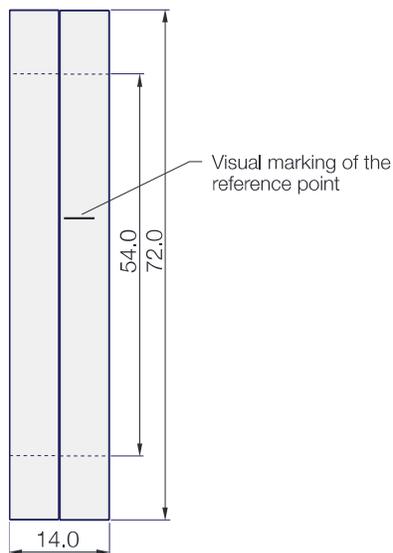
BML-M20-I40-A0-M072/054-R1 dimensions
